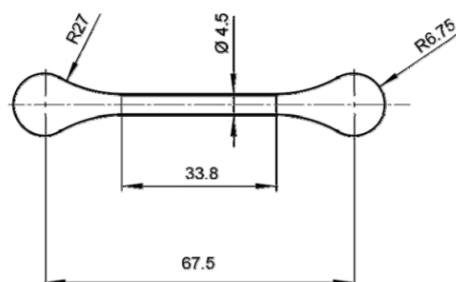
Tensile test specimen according to ISO 2740. Dimensions shown are in millimeters
